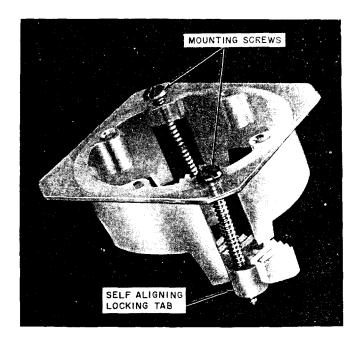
♦KS-20502, List 2 Mounting Bracket♦
